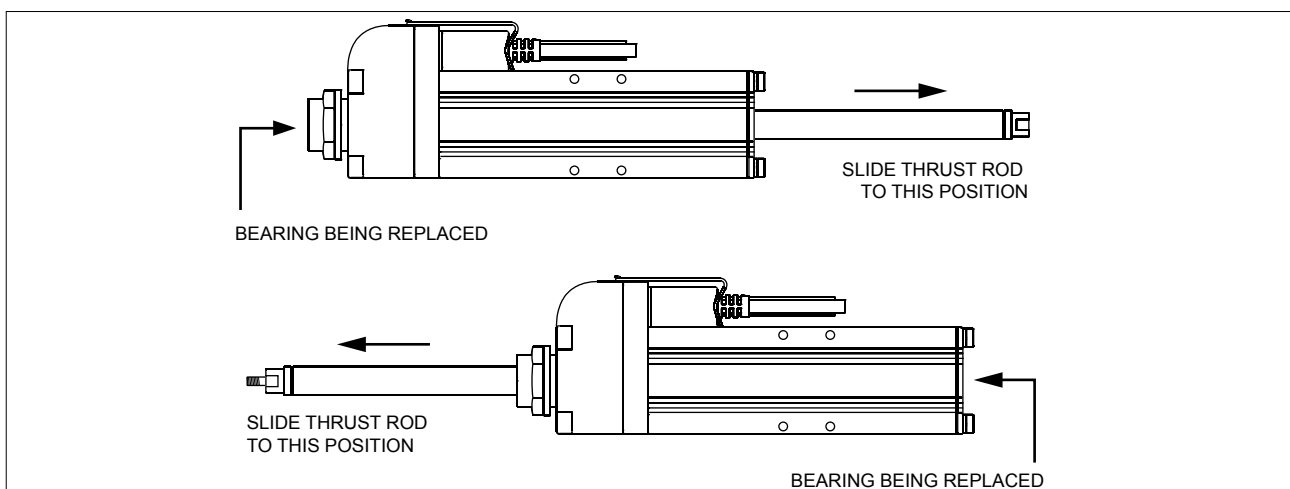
Positioning the thrust rod when removing a bearing./
